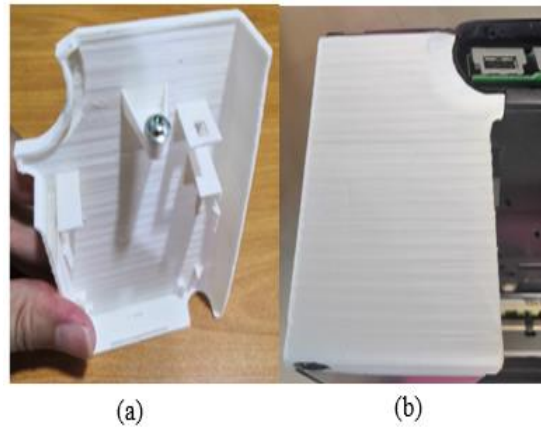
Successful Screw Insert and Assembling of the 3D-Printed Prototype of Front Panel Cover
